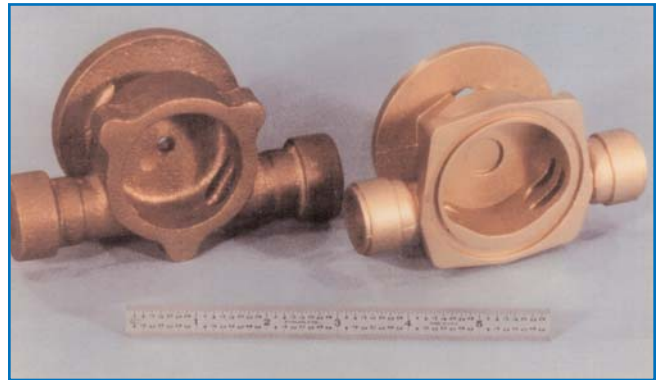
Water Pump Housing - C84400 Sand casting, left; SSM formed in C37700, right.
